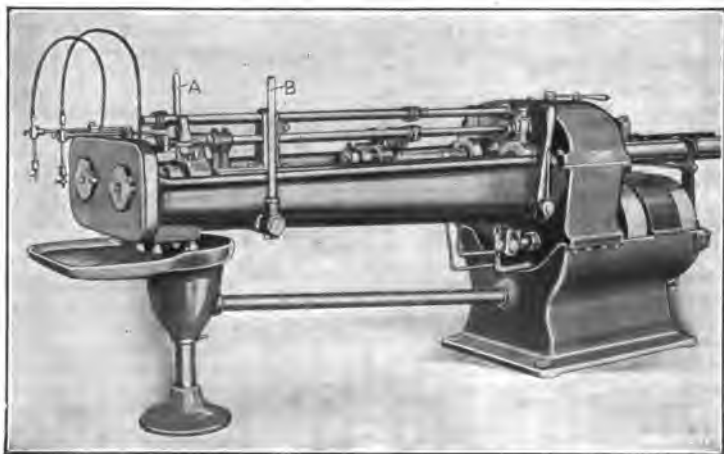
Duplex Broaching Machine made by the J. N. Lapointe Co.
